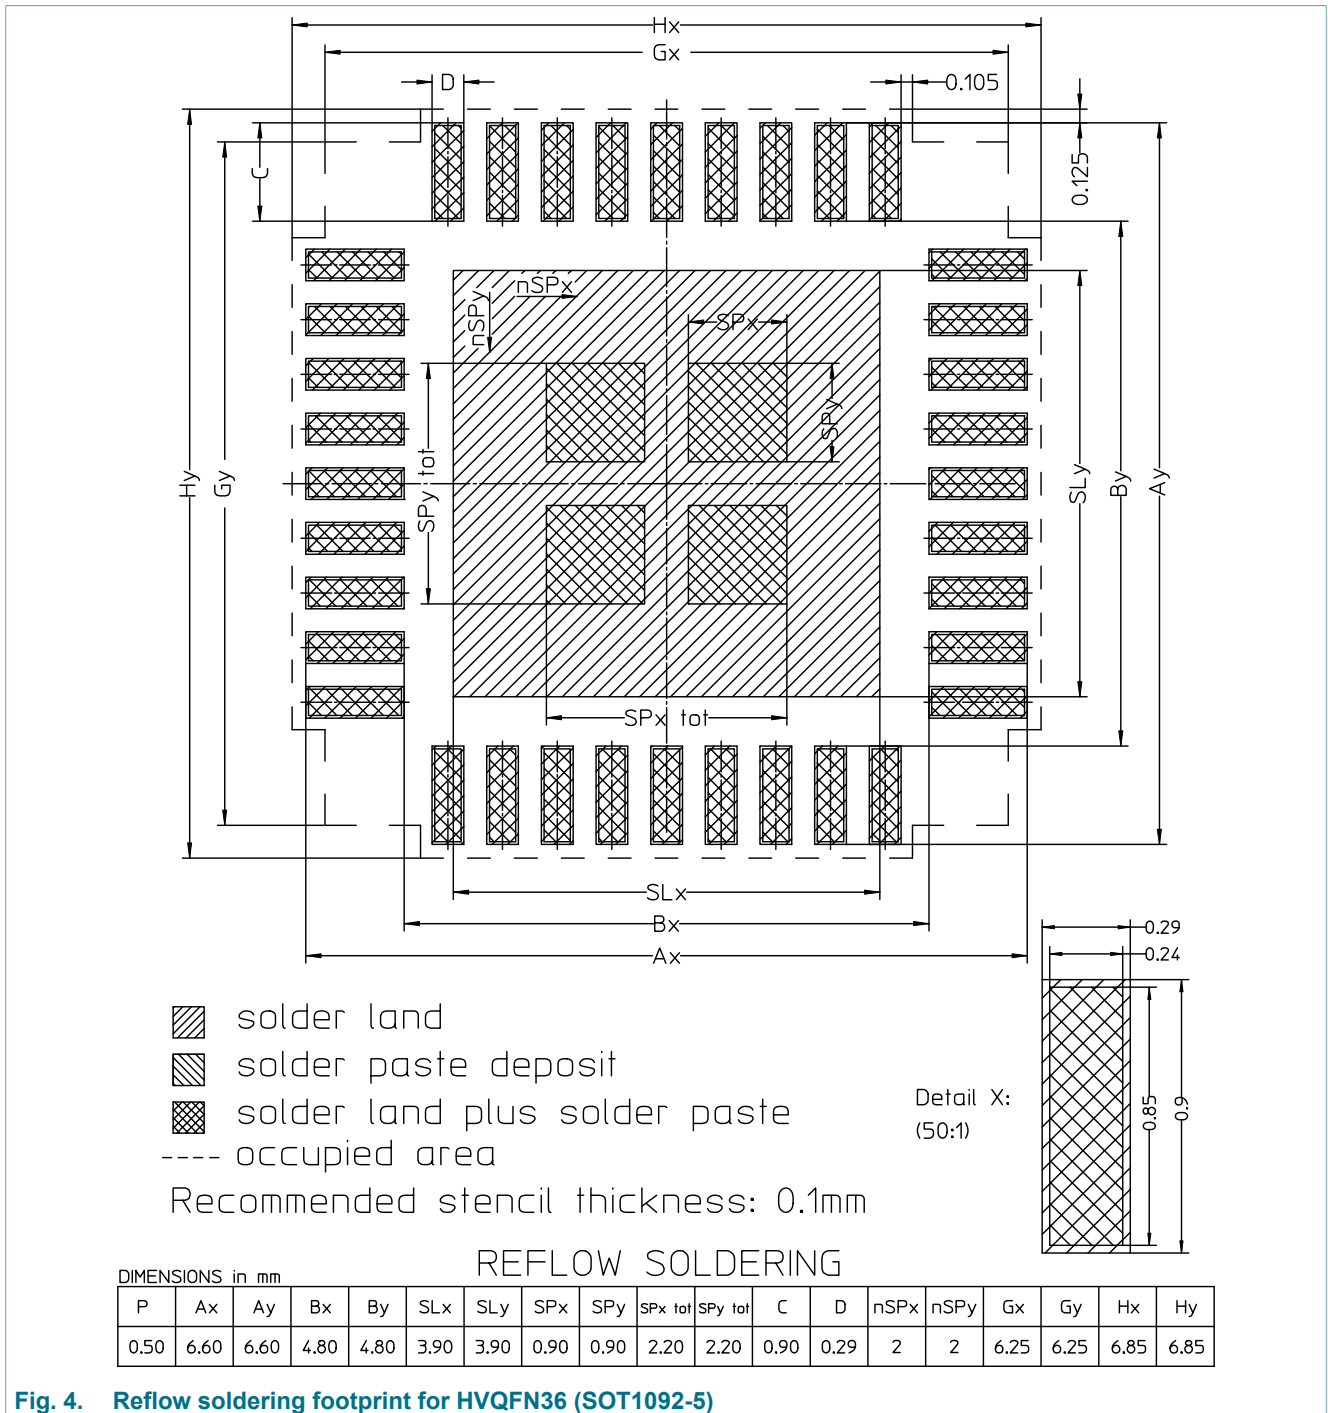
Reflow soldering footprint for HVQFN36 (SOT1092-5)
